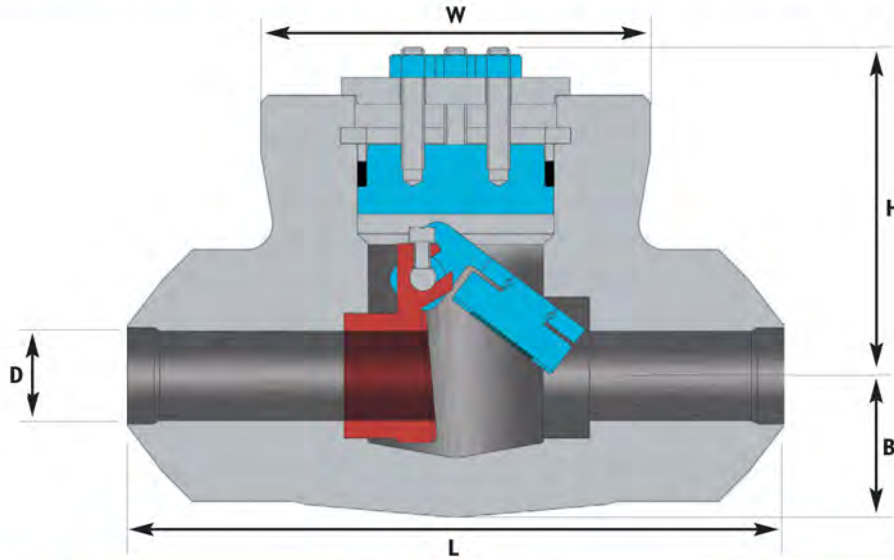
Class 1690 Butt Weld Ends
